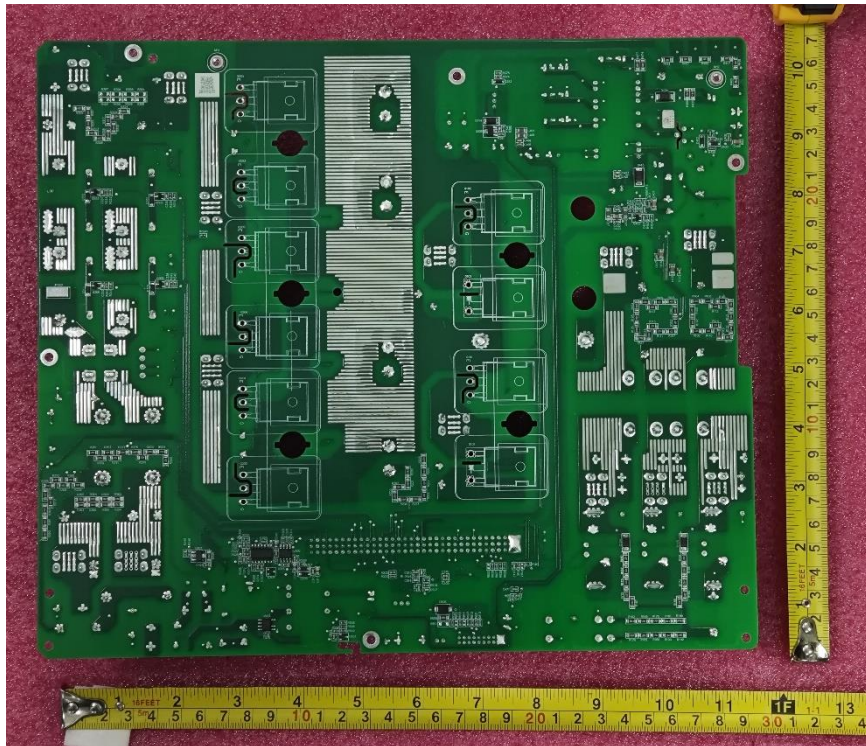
Bottom side view of power board for models GW3K-DNS-G40, GW3.6K-DNS-G40
